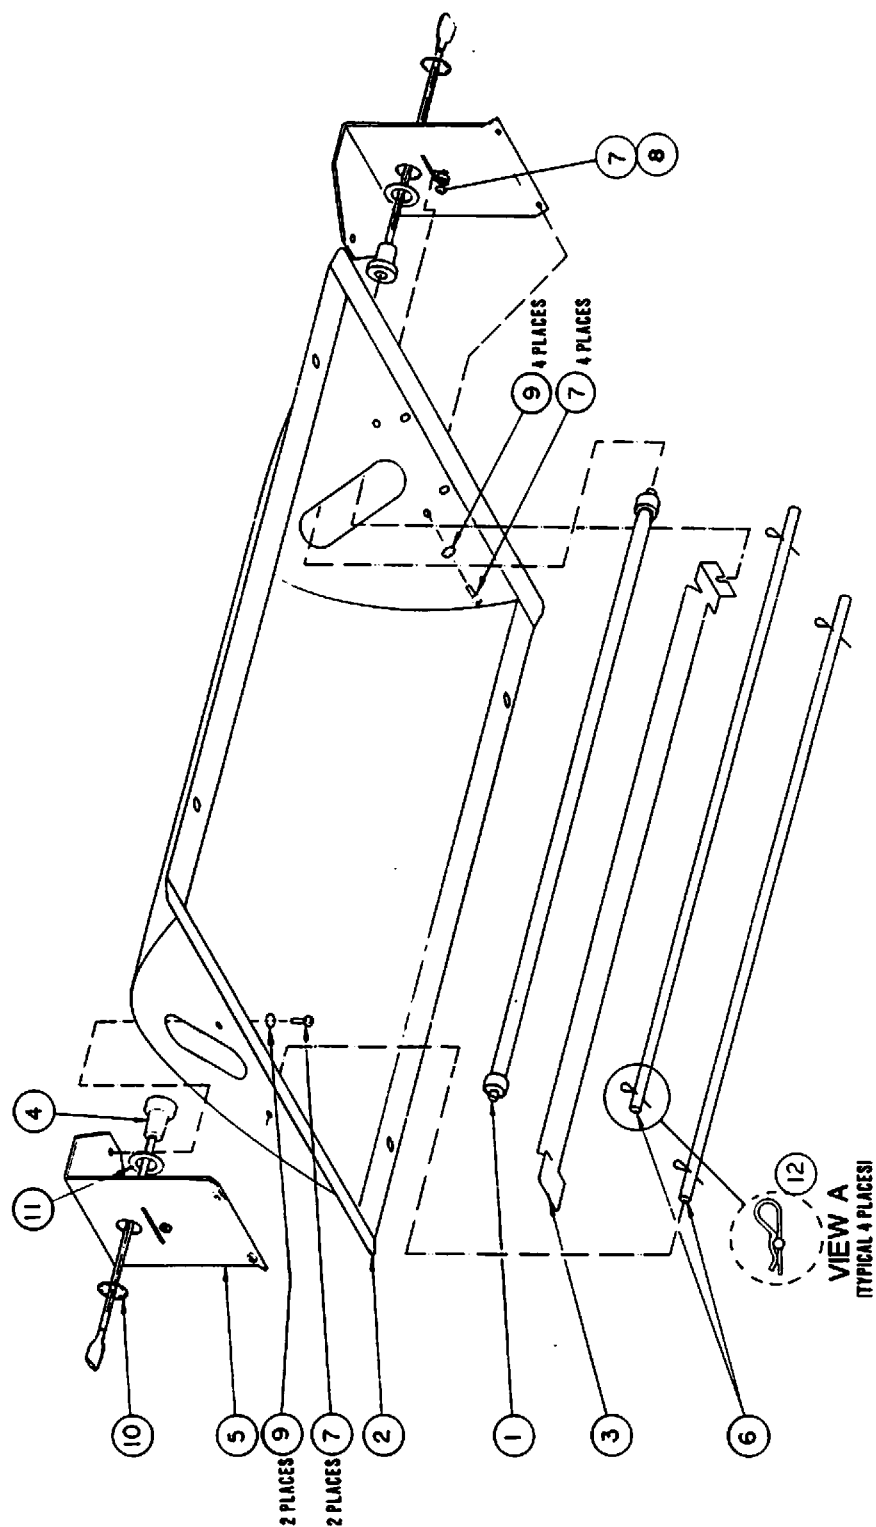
HEATER/REFLECTOR ASSEMBLY, PARTS LOCATION DIAGRAM
